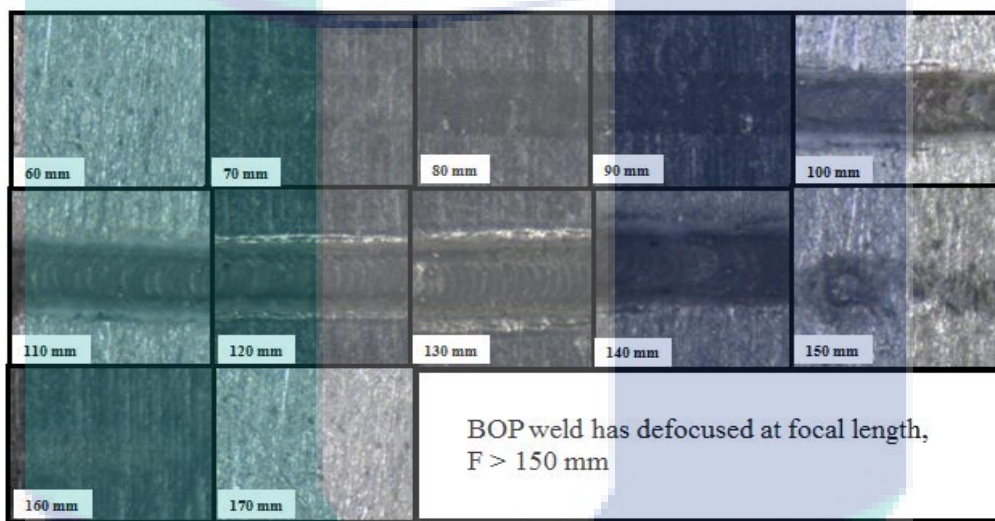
Weld line produced on sample surface (CW) with different focal length.
